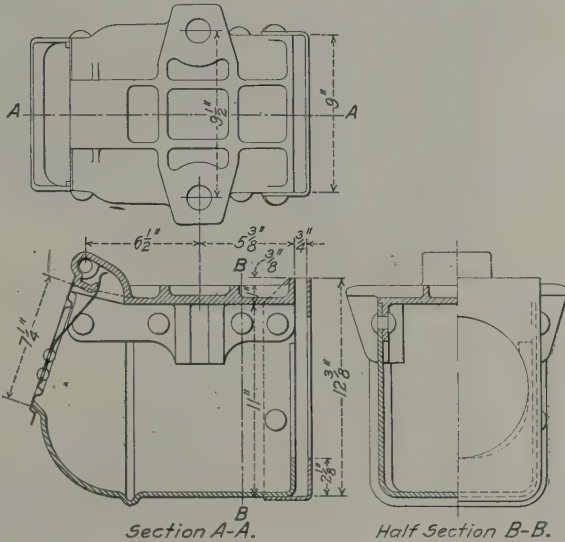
Kensington Steel Journal Box with Inside Lid Spring. Union Spring & Manufacturing Company.
